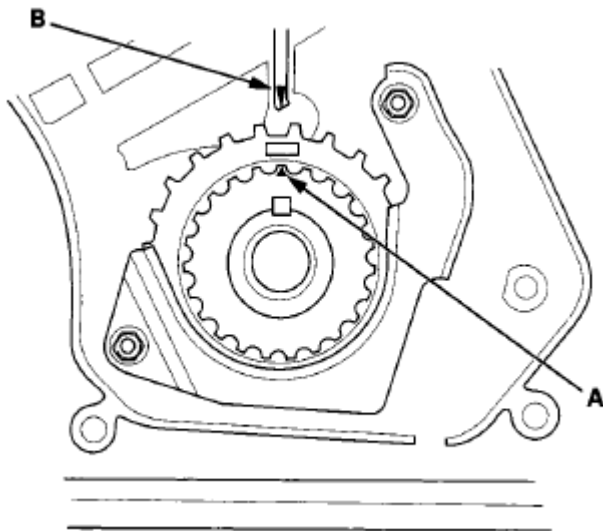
Setting Timing Belt Drive Pulley To Top Dead Center
